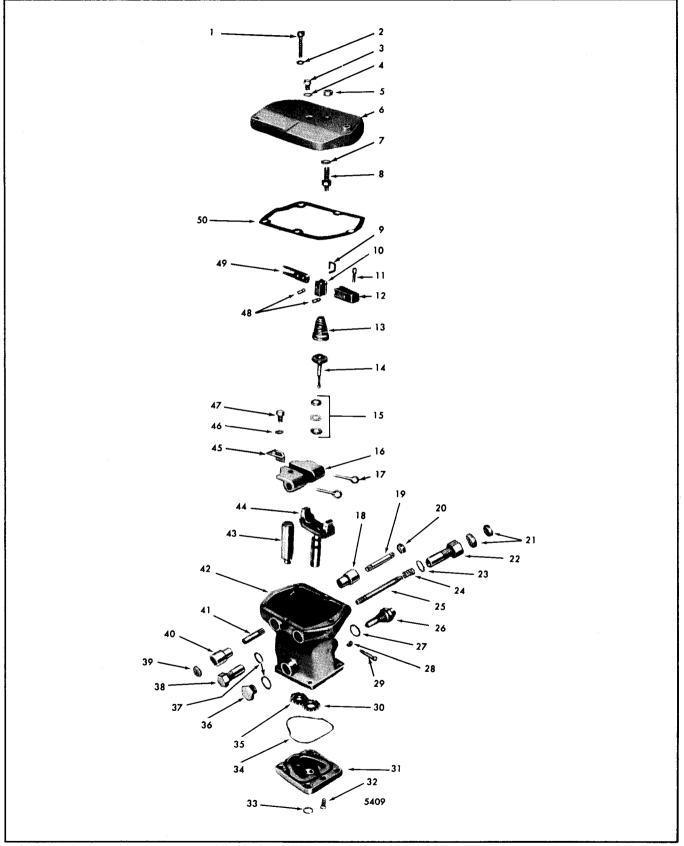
Hydraulic Governor Details and Relative Location of Parts (Former)
